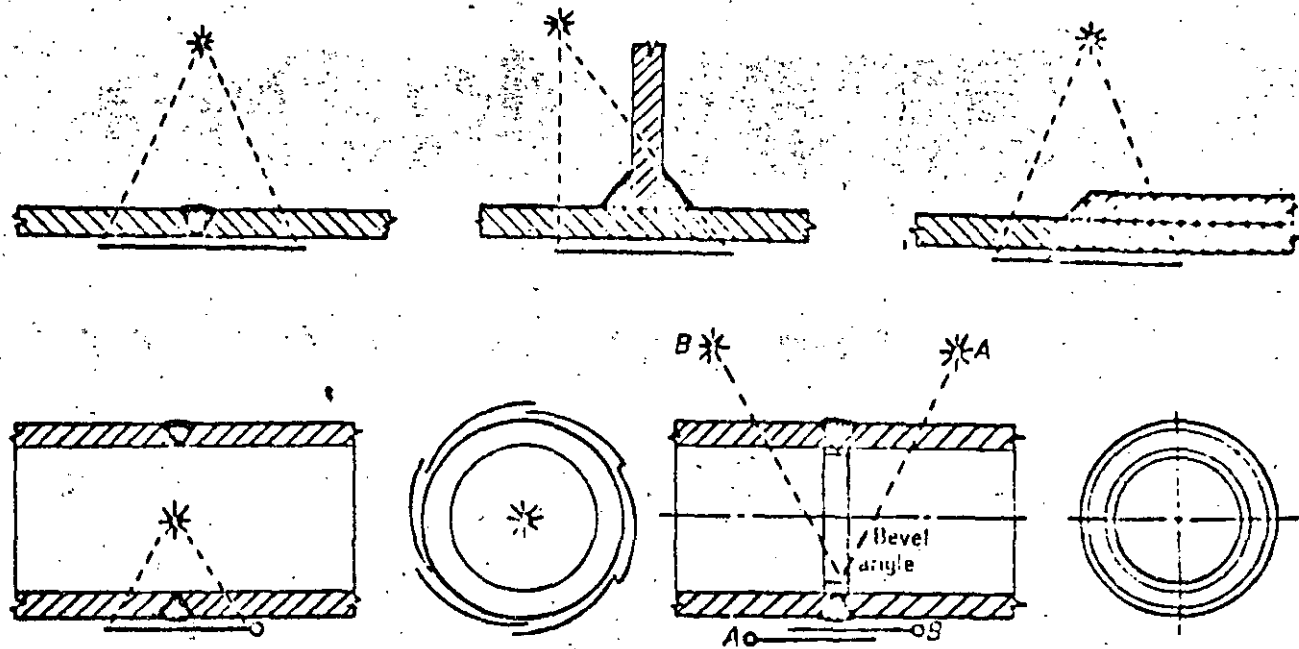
Typical arrangements of X-ray source and film in radiography of welds. The angle of exposure and the geometry of the weld influence interpretation of the negative. Note that multiple exposure may be necessary for pipe welds. Of the several welds shown above, fillet welds are the most difficult to x-ray and the most difficult to interpret.
